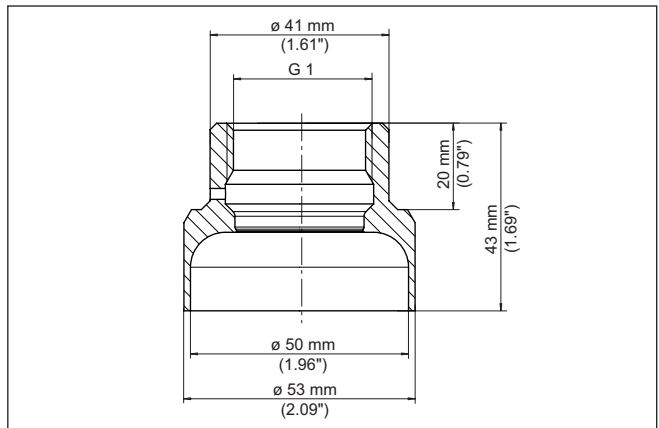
Dimensions direct welded socket for pipe mounting G1 - O-ring sealing
